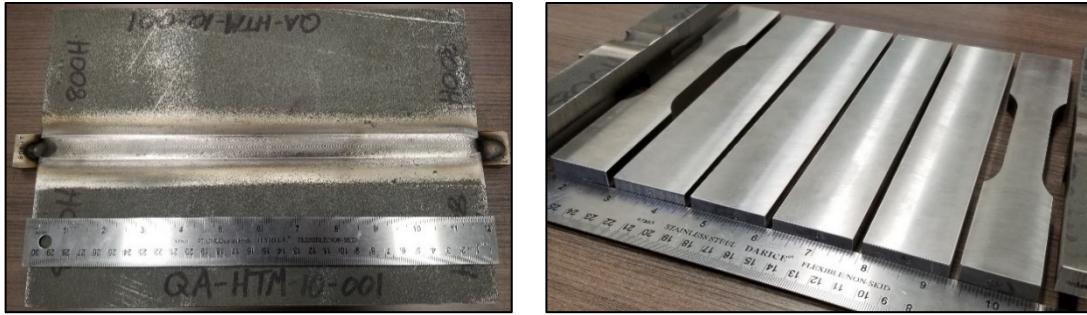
Alloy 800H welded with UTP A 2133 Mn filler metal using five passes (left), and ASME mechanical test specimens machined from the qualification plate (right).
